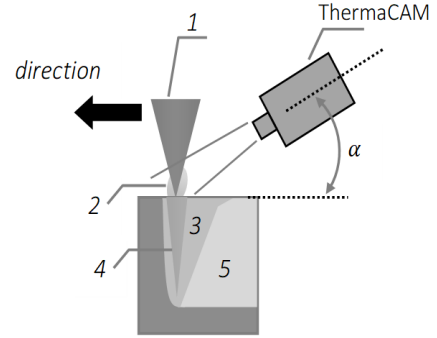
Configuration used for observation with a Optris PI 400 thermal camera. keyhole mode laser welding (1. laser beam, 2. plasma/vapor cloud, 3. molten metal, 4. keyhole, 5. solidified melt).
